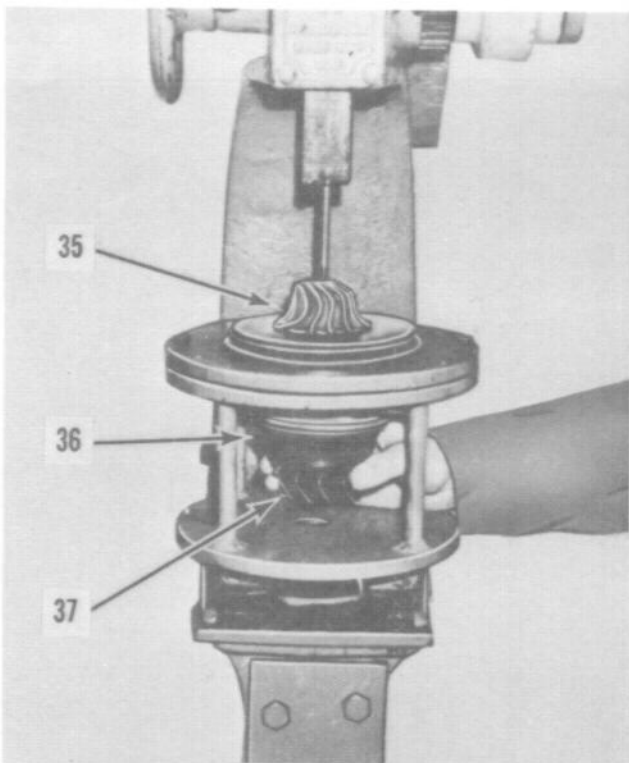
Turbocharger Assembly, Disassembly and Reassembly sheet 1 of 5
